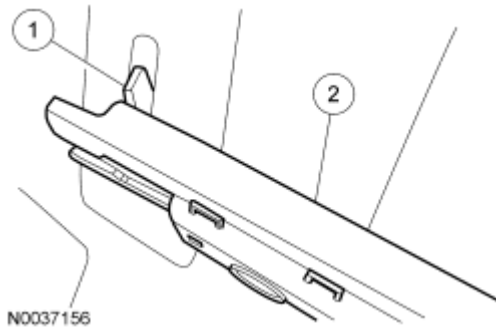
Safety Belt Shoulder Height Adjuster & Tab
